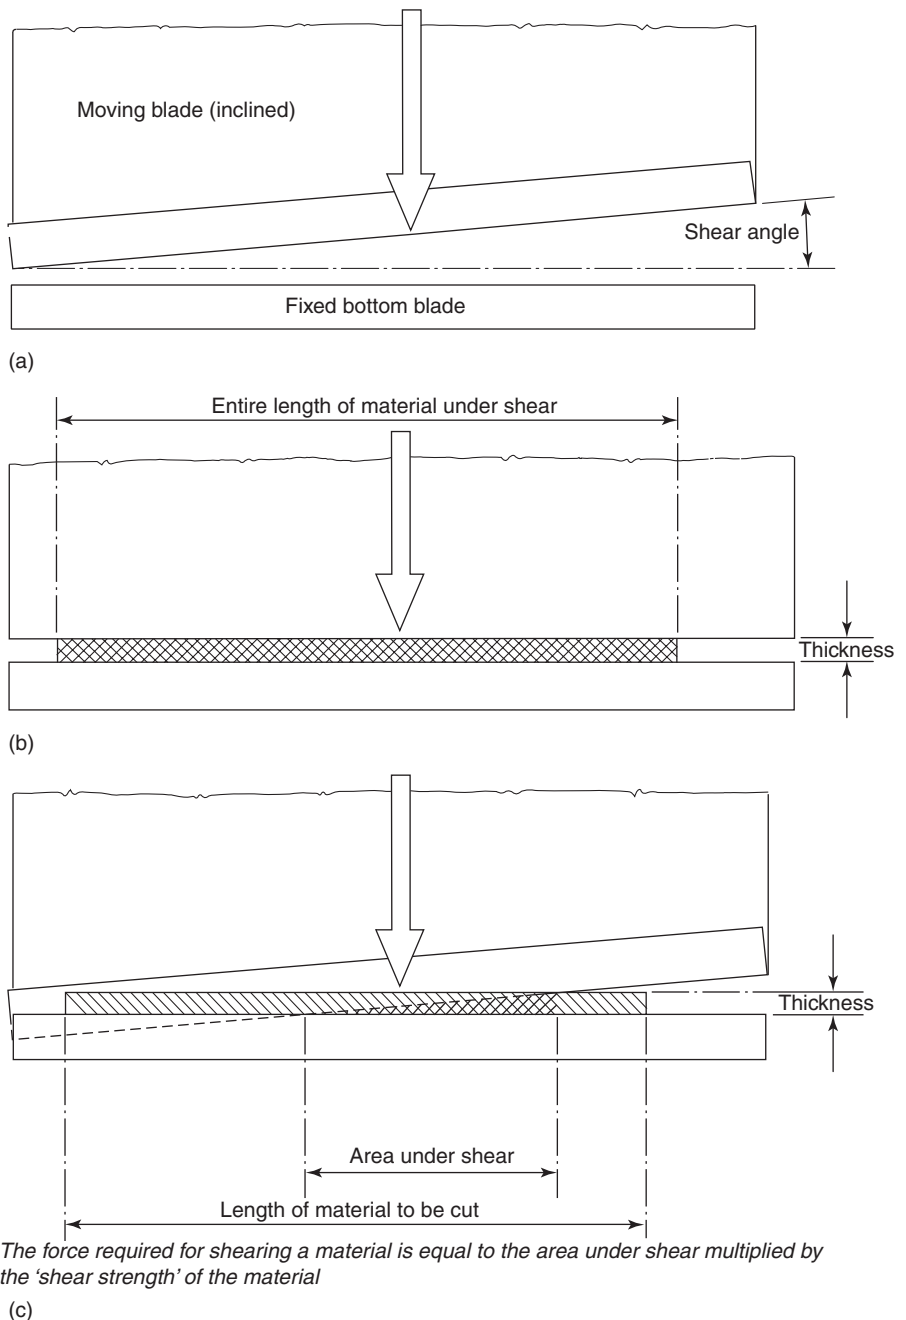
The effect of shear angle (shearing machine): (a) shear blade movement; (b) parallel cutting blades; (c) top cutting blade inclined
